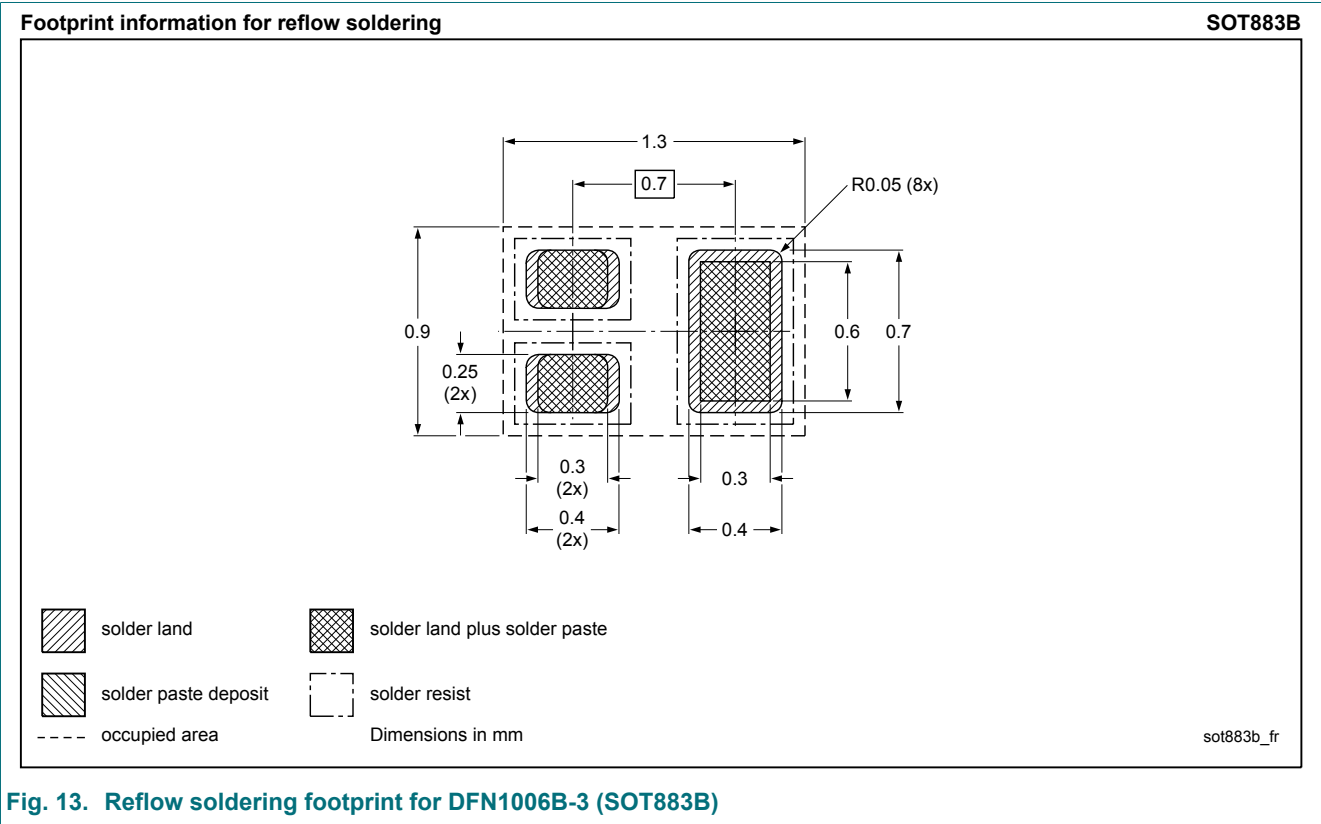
Reflow soldering footprint for DFN1006B-3 (SOT883B)
